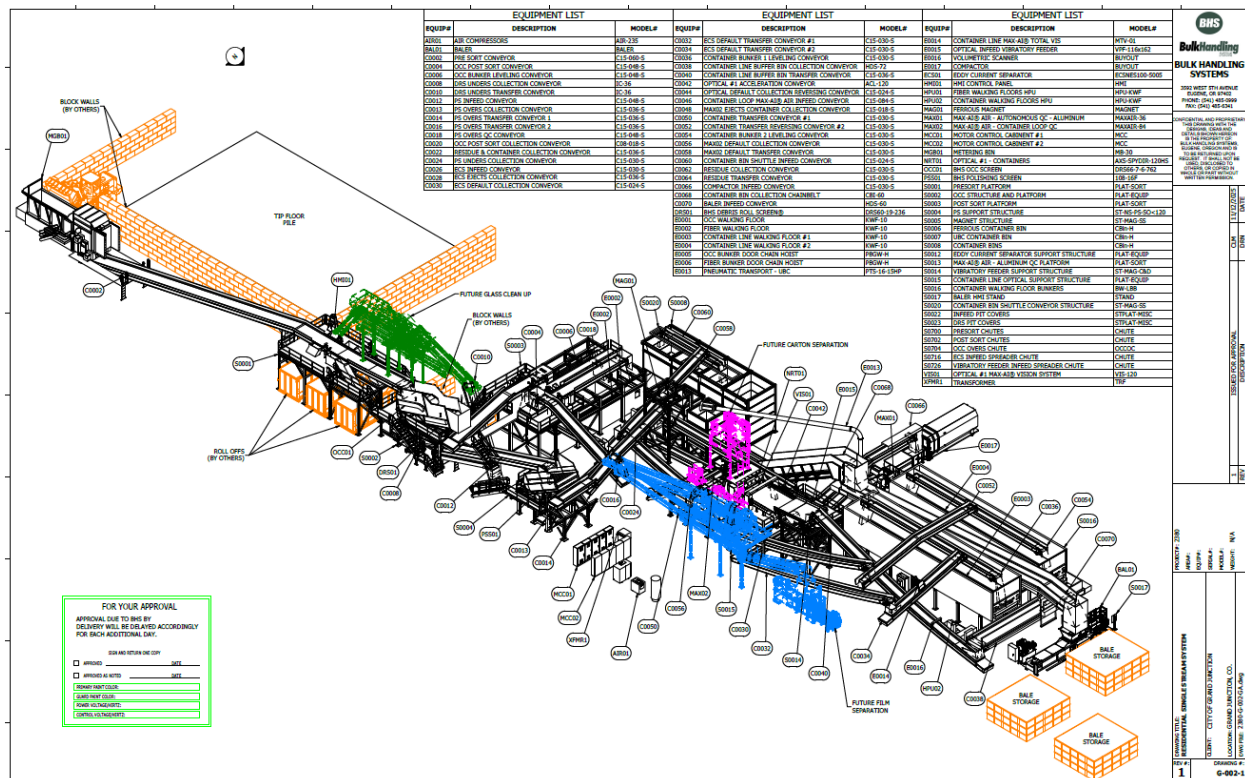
Preliminary Recycling Facility Equipment Schematic Layout (BHS)
